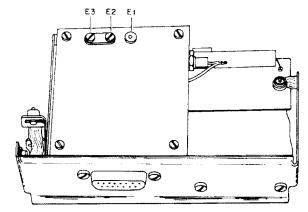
Line Sensor Range Adjustment, Parts Location
